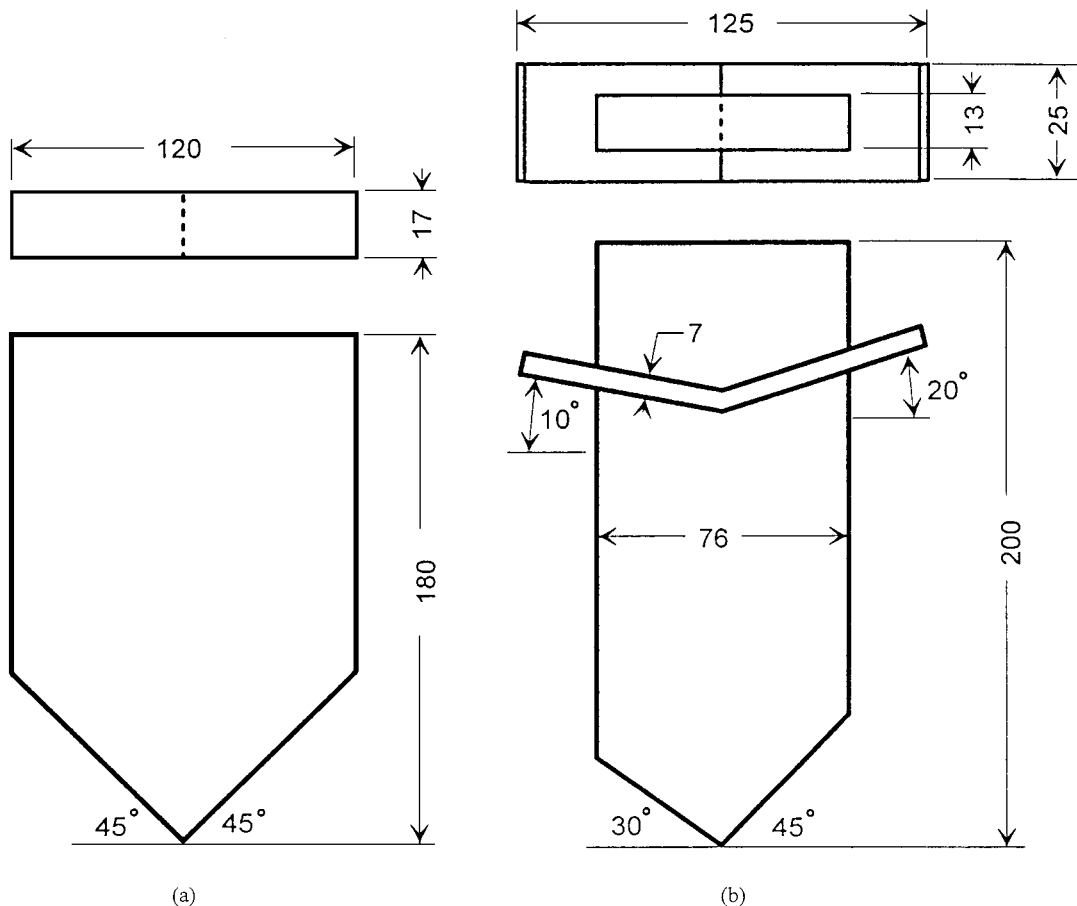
The geometry of (a) the radial casting and (b) the tangential casting. The dimensions given are in millimeters.
